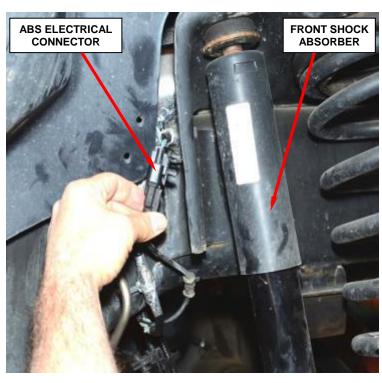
ABS Wheel Speed Sensor Electrical Connector
